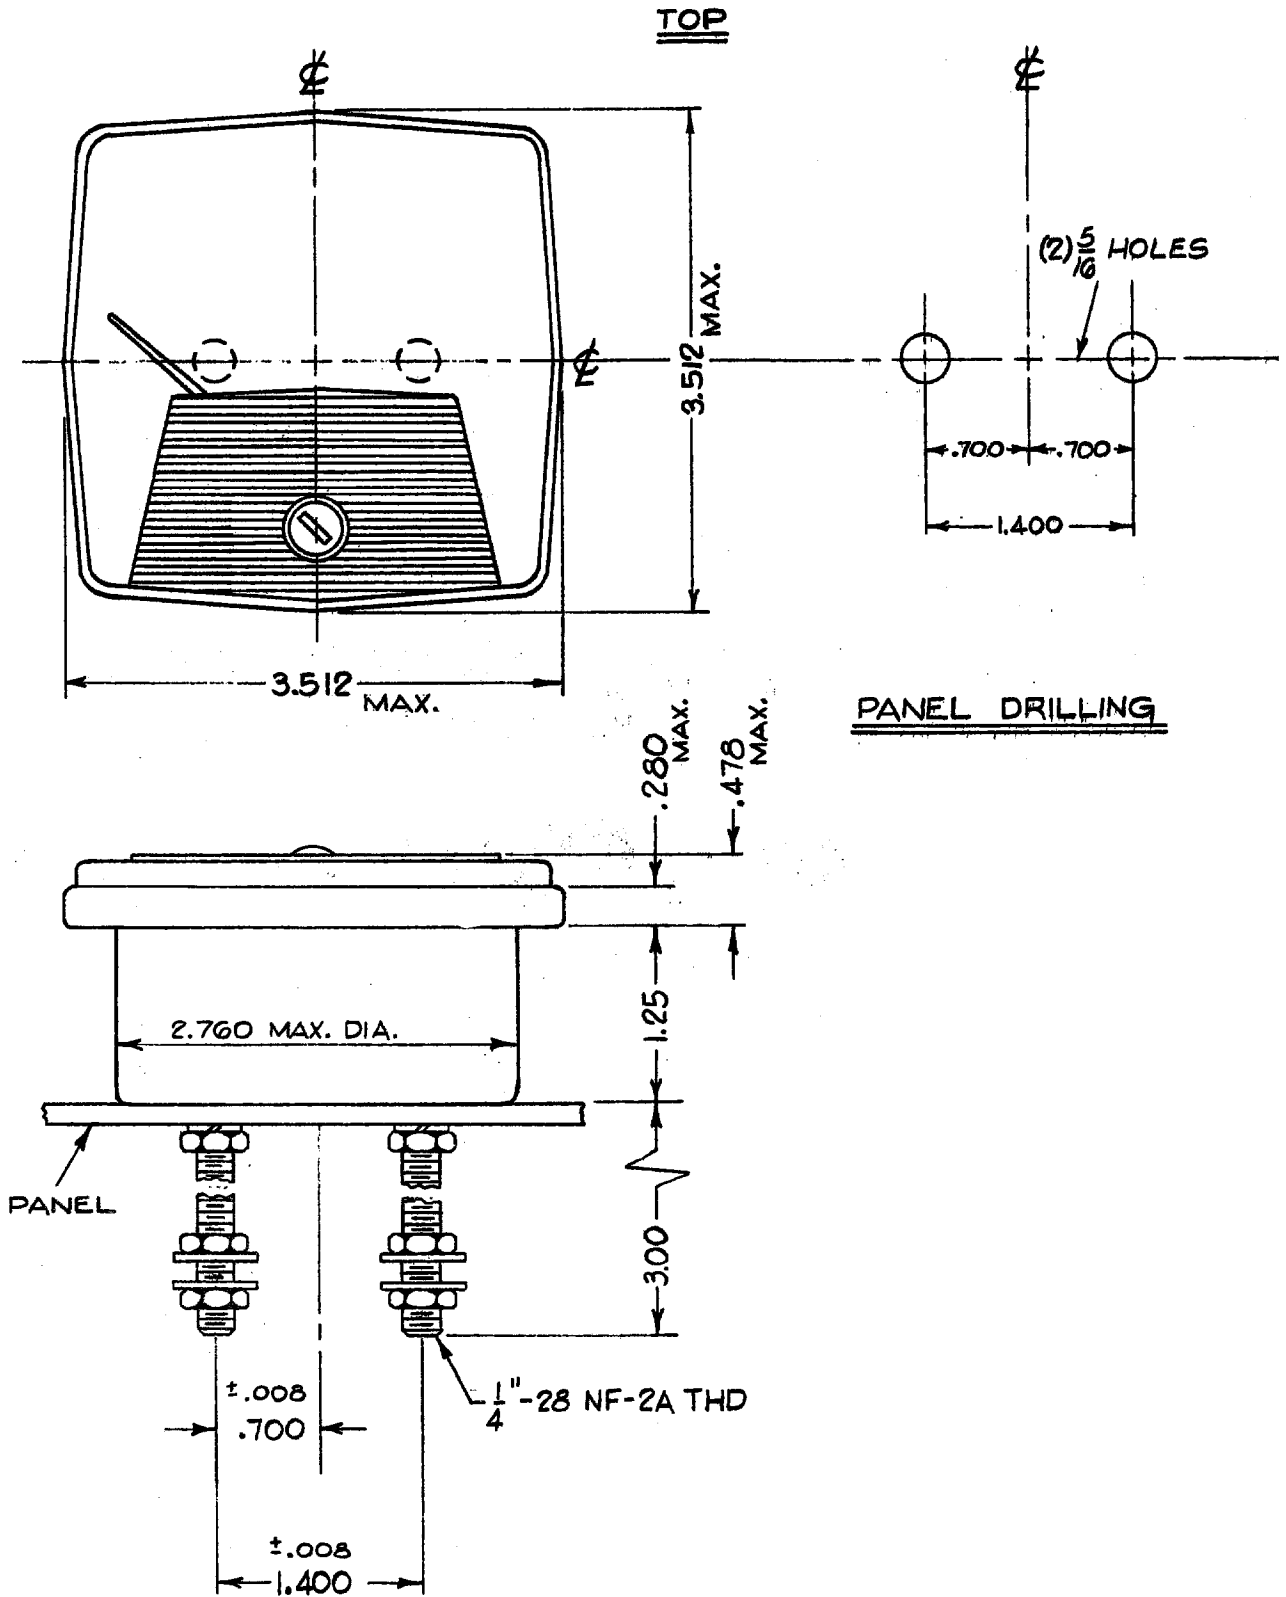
(0148A3872-0) Outline and Panel Drilling for Surface Mounted Meter (Type D0-91)
